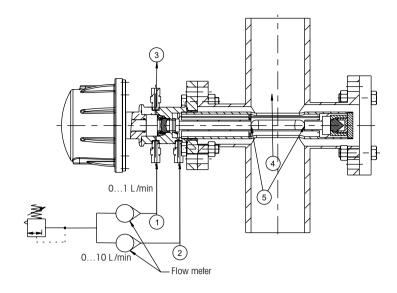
Purge gas rotameter connections for standard purge (SP) probe
